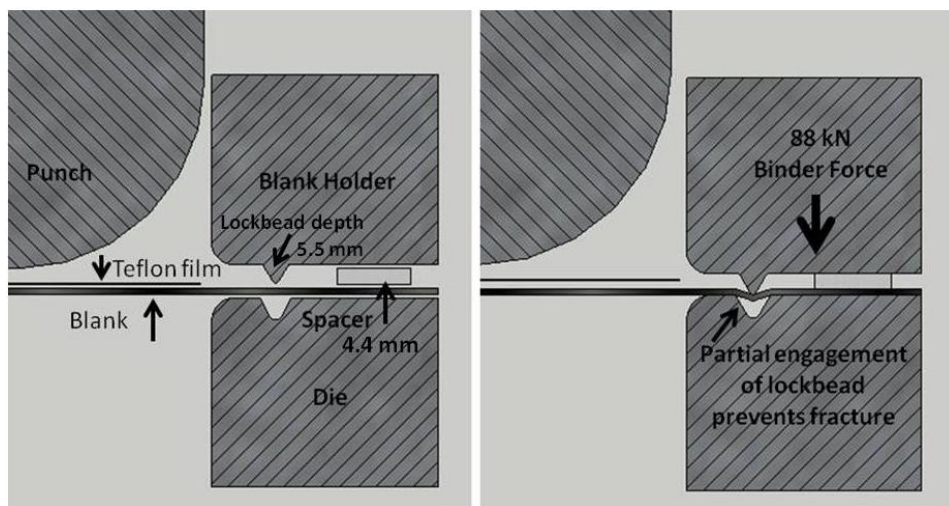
Die and blank holder lock-bead engagement with spacer. Blank holder disengaged (left), engaged (right)
